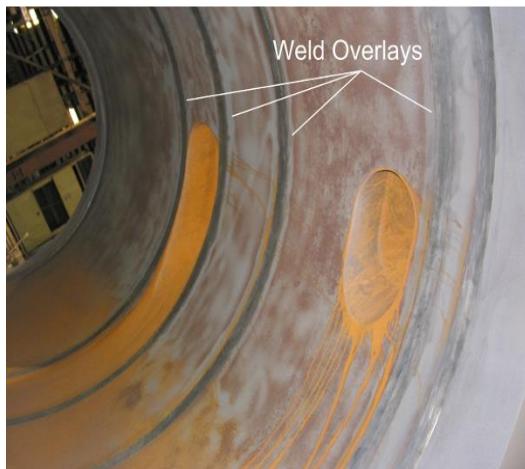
Vertically Split Compressor Casing with Stainless Steel Weld Overlays at O-ring Groove Locations
